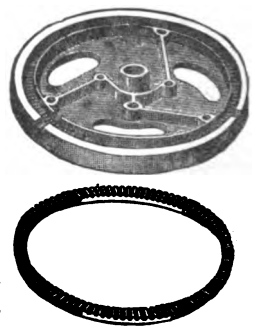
, 1539, show *Horton's* lathe chuck. The jaws are moved by geared screws and circular rack.
